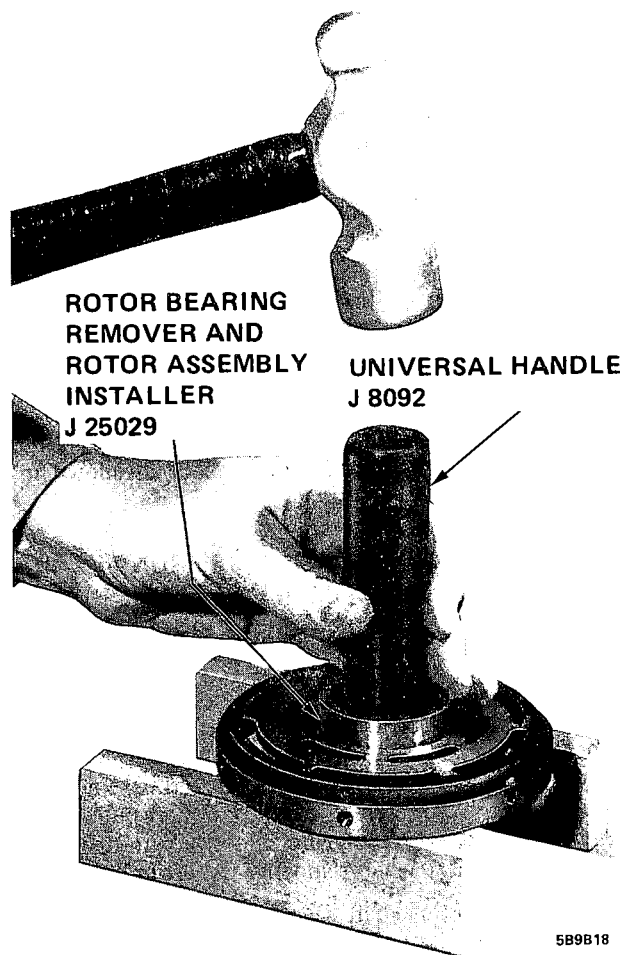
B-42 - Driving the Bearing Out of Rotor Hub - 4 Cylinder Compressor
